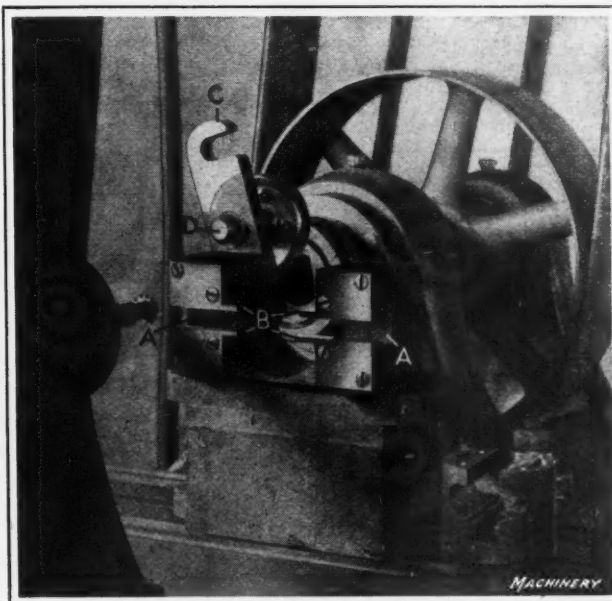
Cradle Fixture in which the Work is located during the T-slotting Operation
